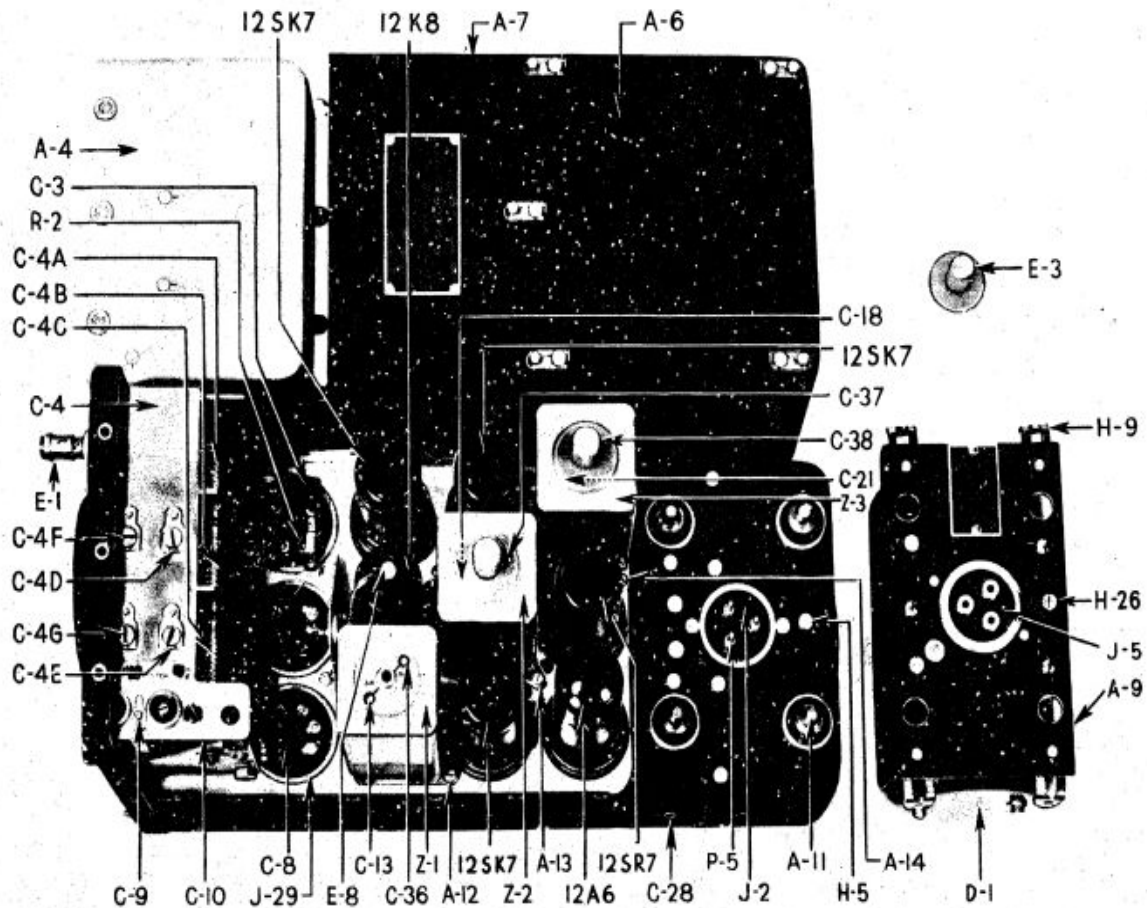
TYPICAL RECEIVER, TOP VIEW, INSIDE, AND BOTTOM VIEW OF RECEIVER DYNAMOTOR UNIT
